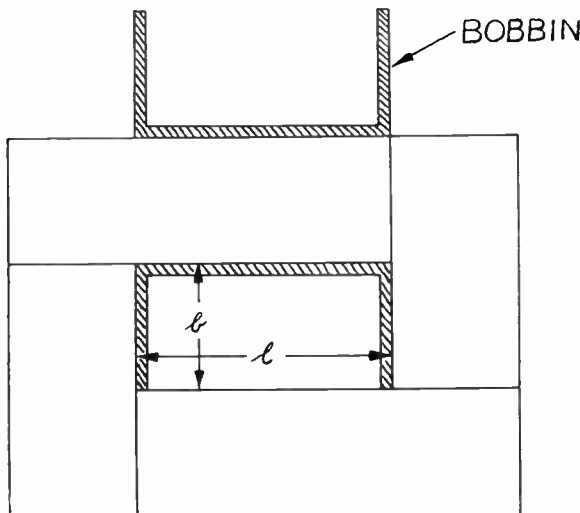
A TRANSFORMER CORE BUILT UP FROM STRIPS OF STALLOY.
